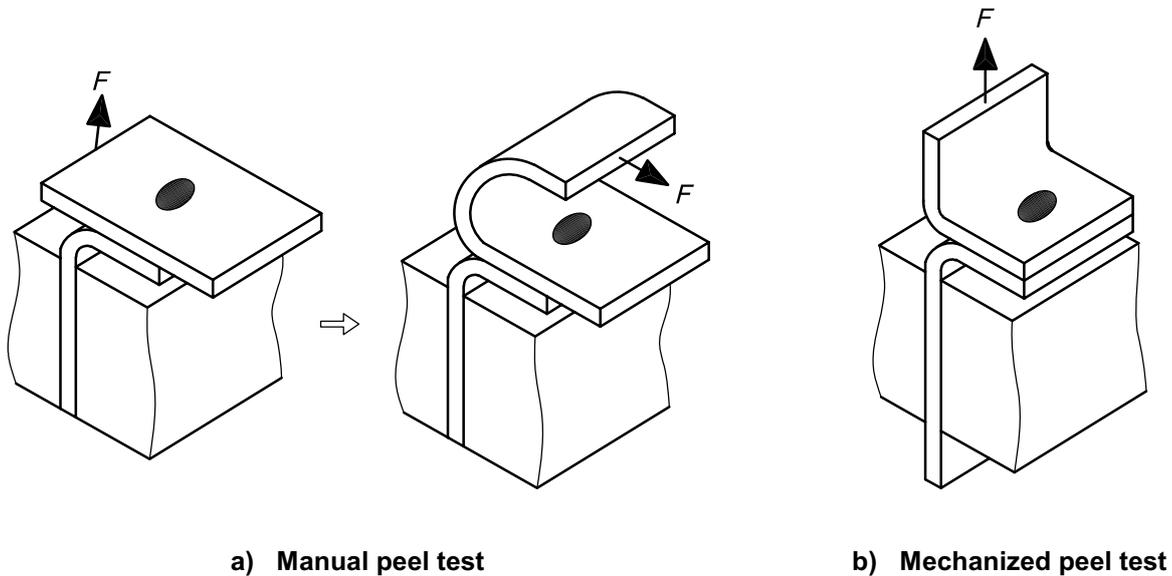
Peel routine test on resistance spot and protection welded joints
